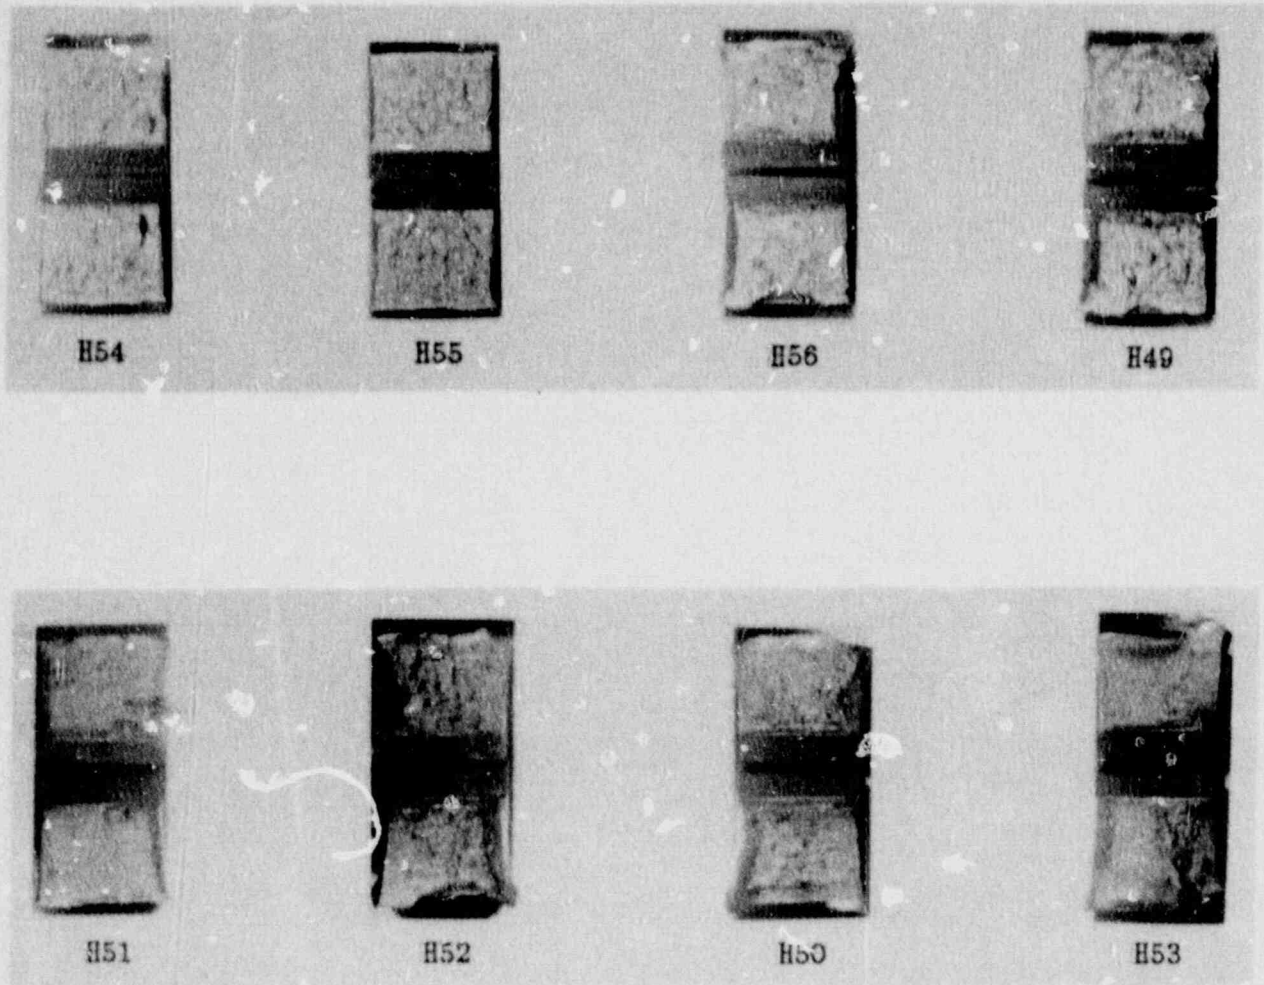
CHARPY IMPACT SPECIMEN FRACTURE SURFACES FOR ZION UNIT 2 REACTOR VESSEL WELD HAZ METAL
